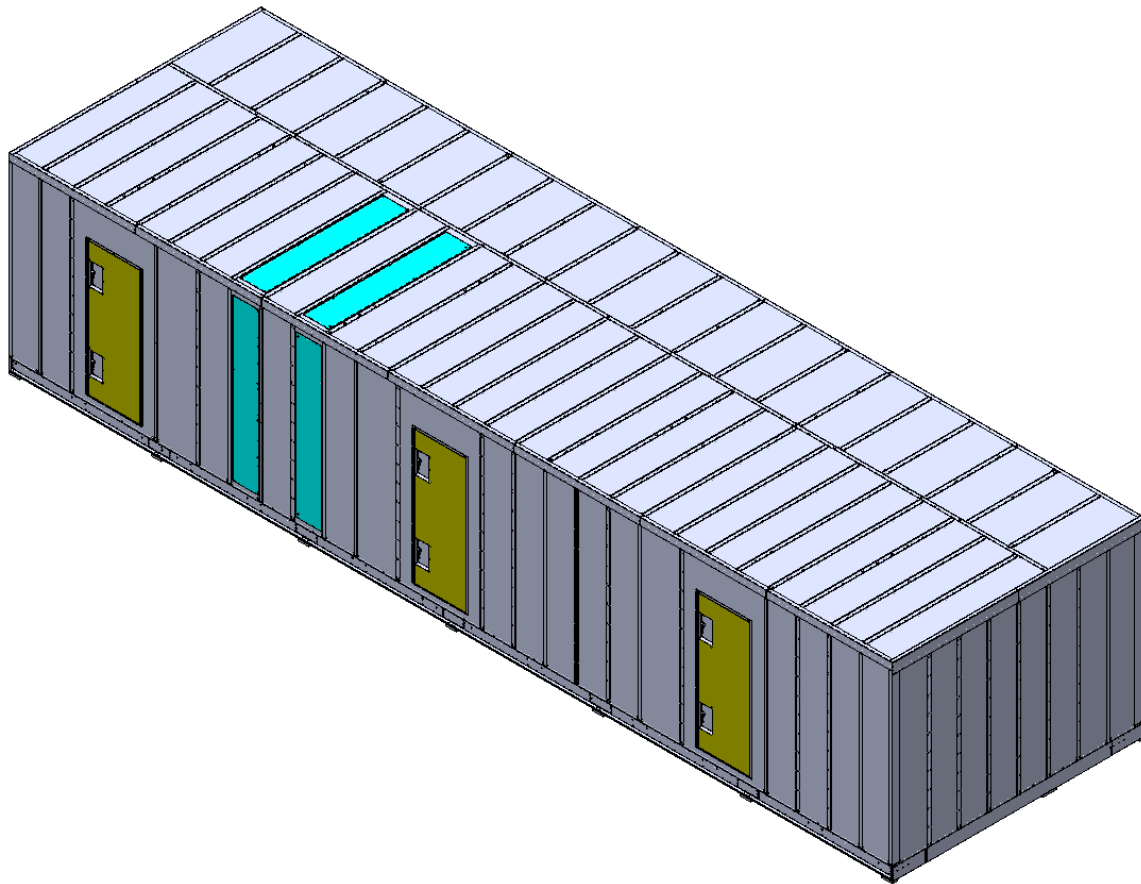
Final arrangement of all panels for the airside subsystem.
